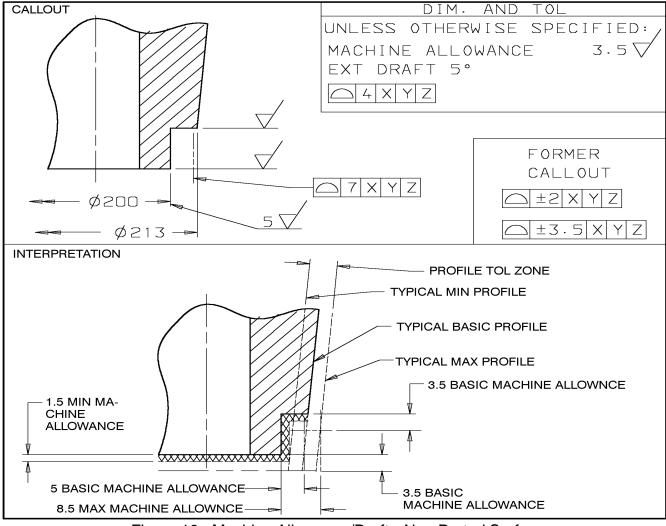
Machine Allowance/Draft - Non-Parted Surface
